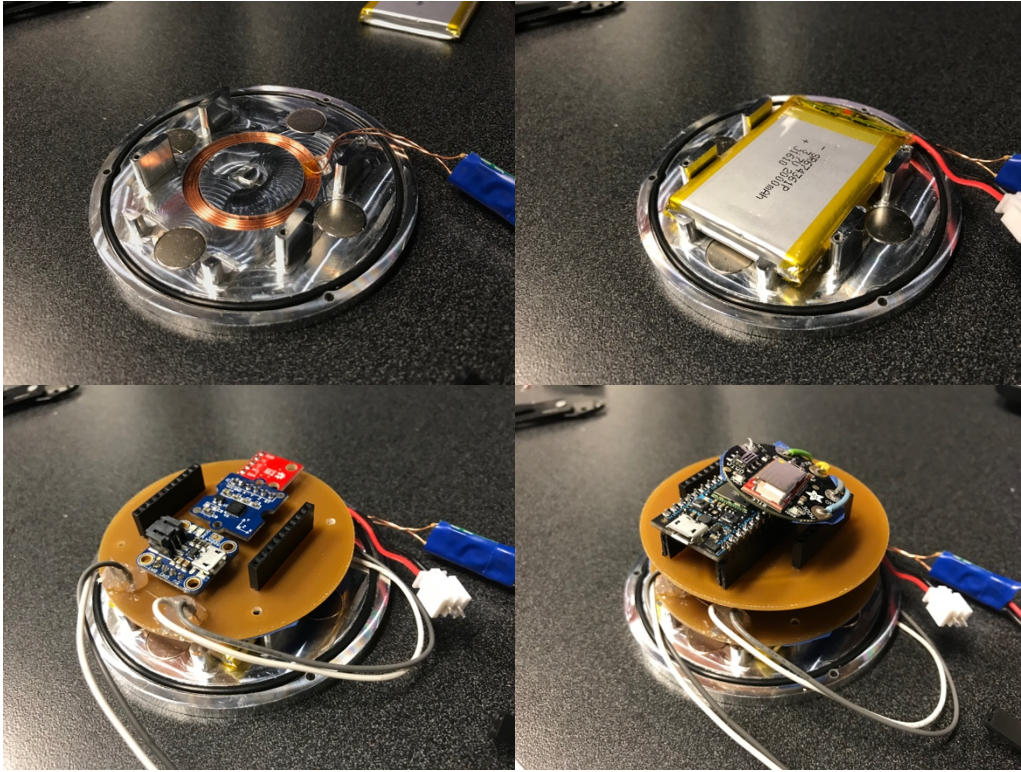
WASP sensor pack in various stages of assembly. [TL] Baseplate with magnets and inductive coil. [TR] Baseplate with battery between gates. [BL] Power jacket mounted to baseplate. [BR] Communication jacket stacked on power board.
